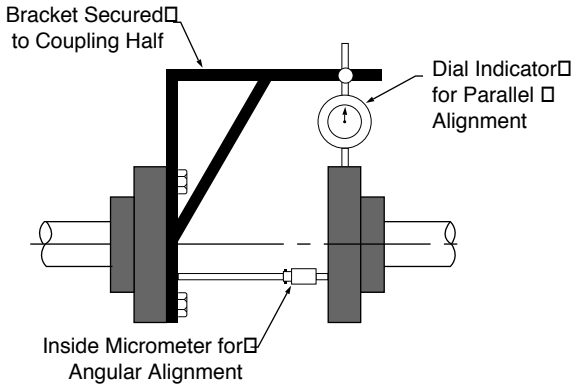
Method of Checking Alignment on a Spacer Coupling
